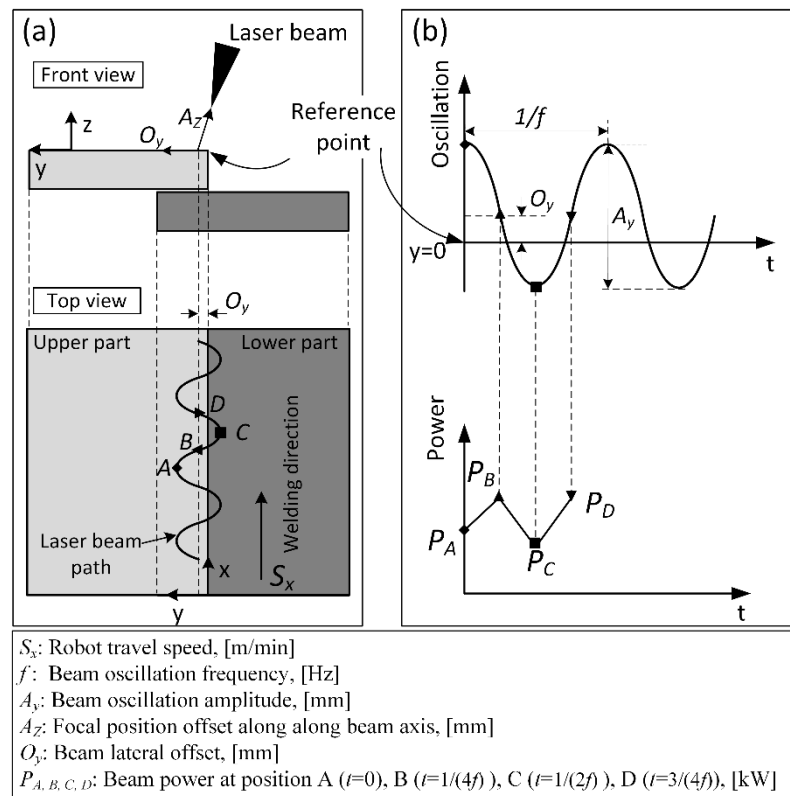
Illustration of key welding parameters. (a) Front view and top view showing the laser beam path; and (b) representation of beam oscillation and power modulation as function of time.
